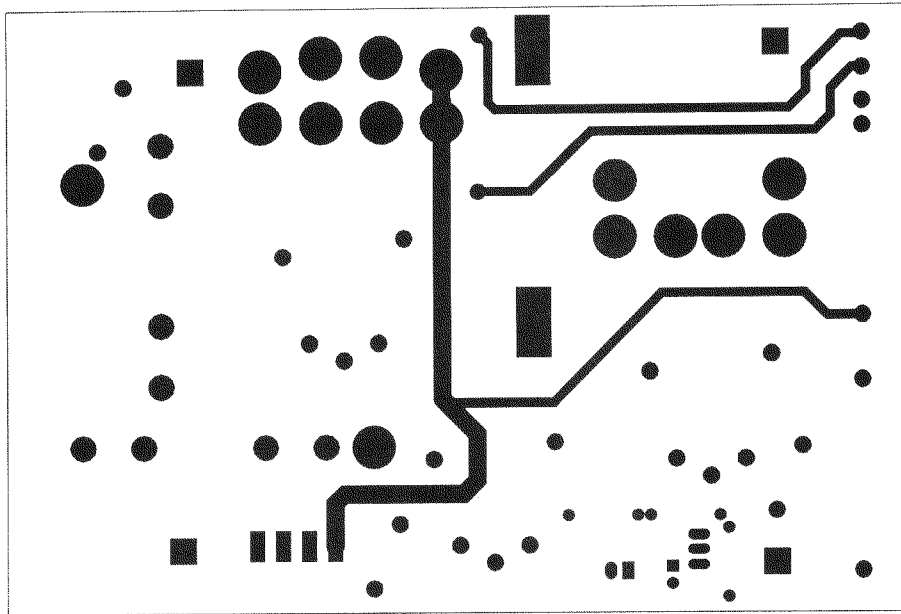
AC LINE DELAY BOARD COMPONENT LAYOUT TOP SIDE
